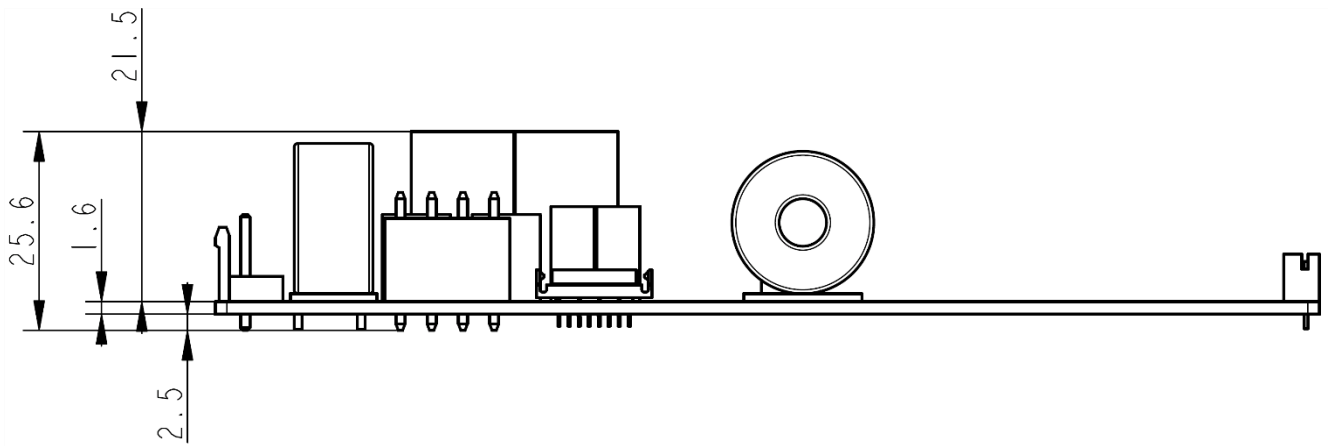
Side view of the ICEpower80AM2 board. Physical dimensions in mm.
